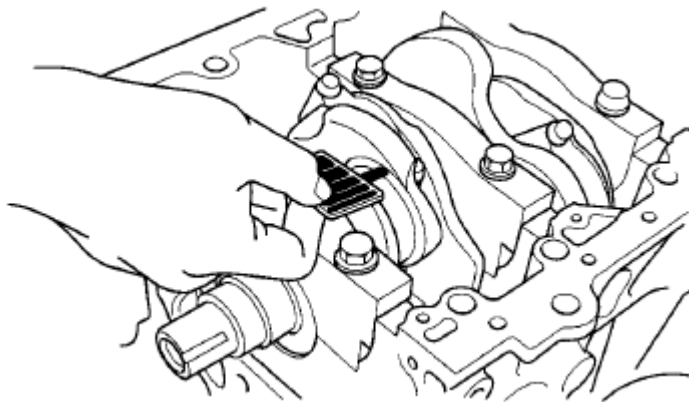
Checking Connecting Rod Bearing-To-Journal Oil Clearance
